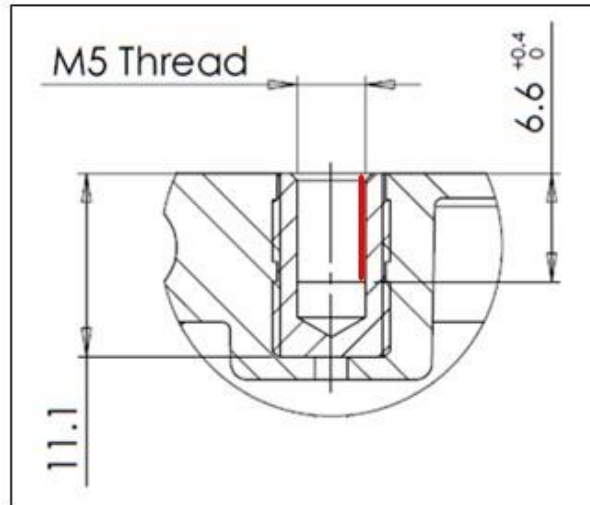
Micronet SmarTab 8 Cradle Rear Panel Mounting Arm PEM Screws Inserts Dimensions
